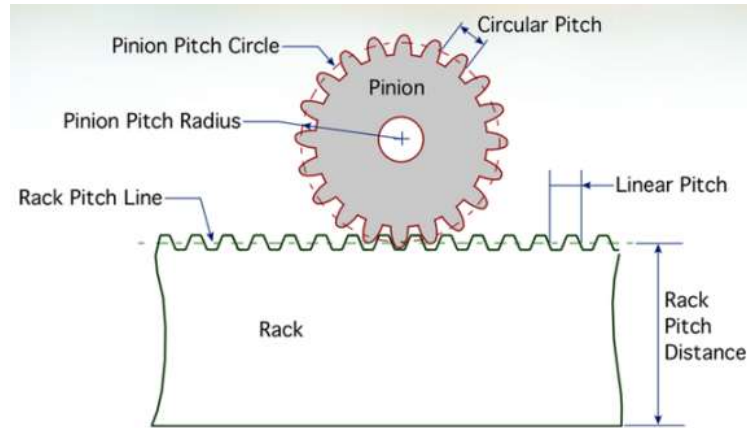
Key details of designing a rack and pinion joint. Reprinted with permission from [63]
